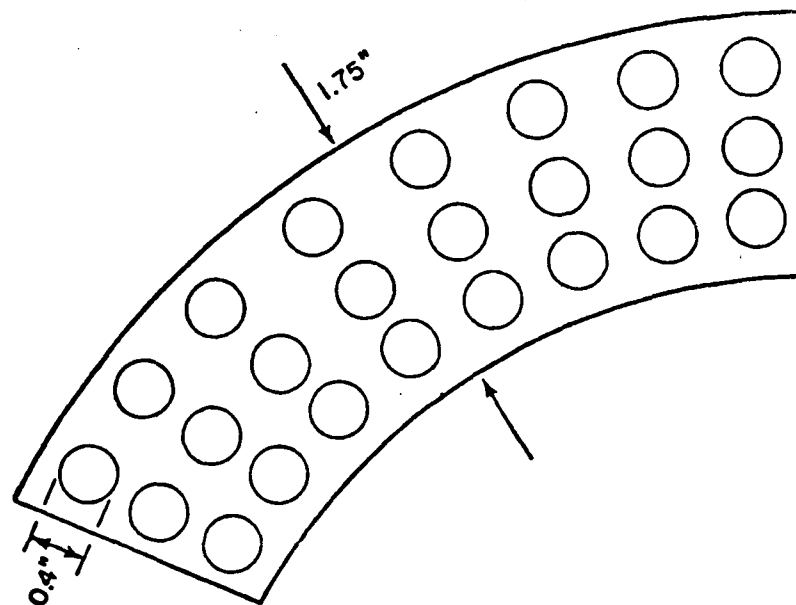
Incoloy 901 Shaft Forging Segment Indicating Cut-Out Pattern for LCF Test Specimens
